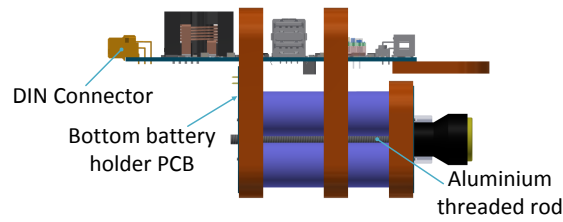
A bottom view of a battery module. The aluminium threaded rod is visible in between the battery cells. It is used to mechanically and electrically connect the cells to the module PCB.
